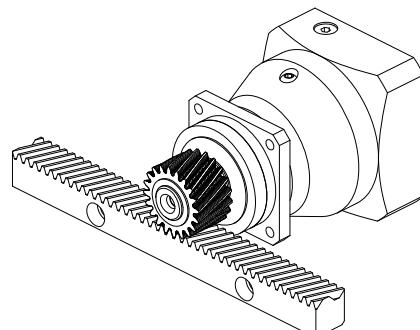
Recommendation for bearing assignment D (e.g. for helical gearing)
